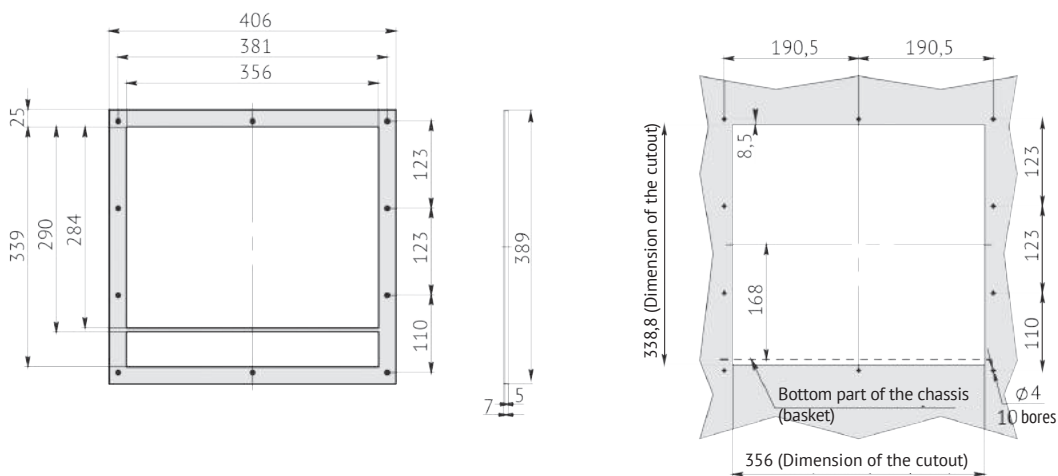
dimension retractable (withdrawable) circuit breakers
